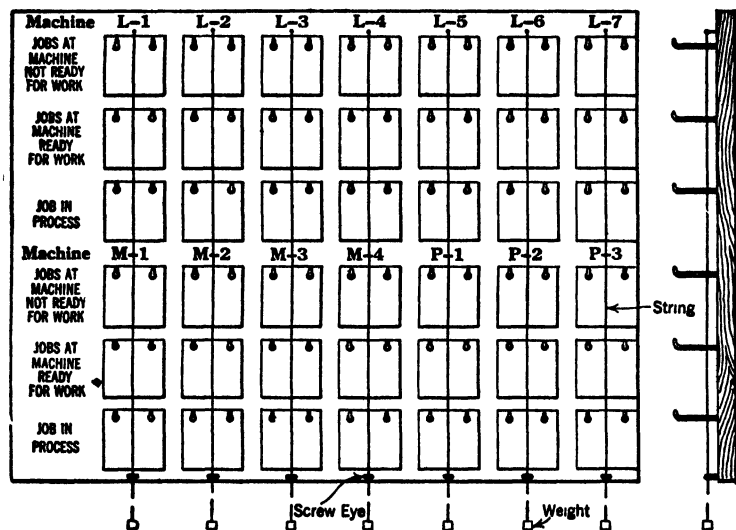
Typical Hook-Type Dispatch Rack or Bulletin Board
